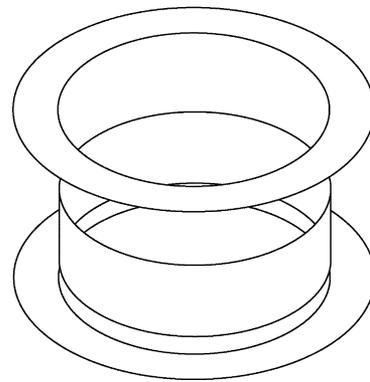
Assembly drawing showing the design of the former in three parts, the center piece made of fiberglass resin and the two outer copper sleeves.
